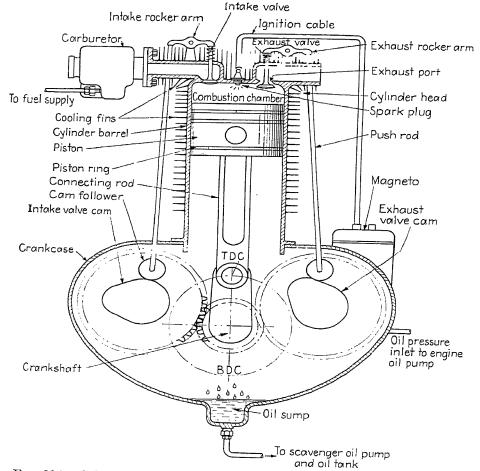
Schematic drawing of a simple internal-combustion engine.
